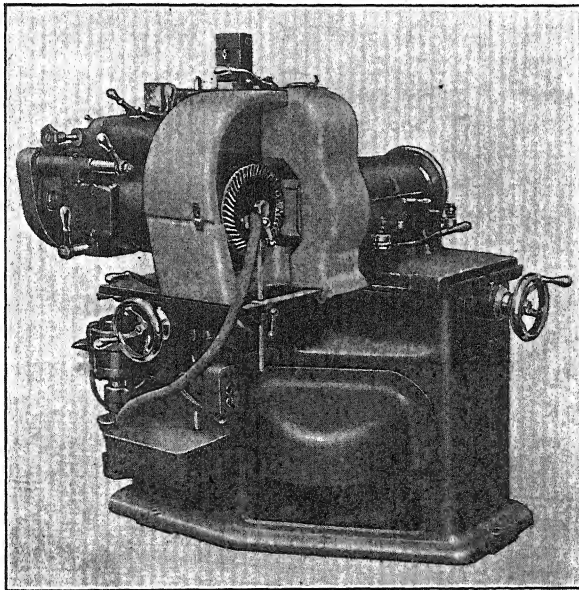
The Gleason 18-In. Combination Testing and Lapping Machine for Spiral Bevel and Hypoid Gears.
